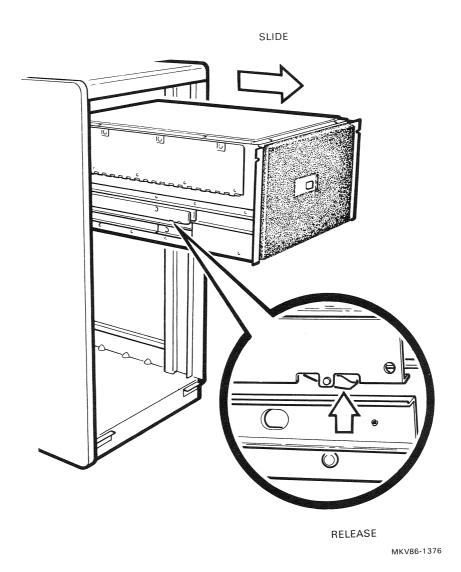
CIPA Mounting Box - Access (Sheet 2 of 3)
